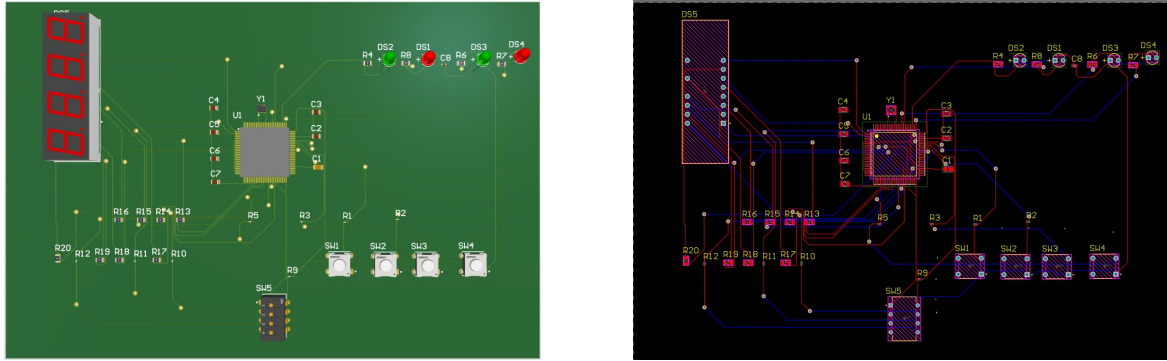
PCB design: 3D render of the assembled board (left) and routed PCB layout in Altium Designer (right)
